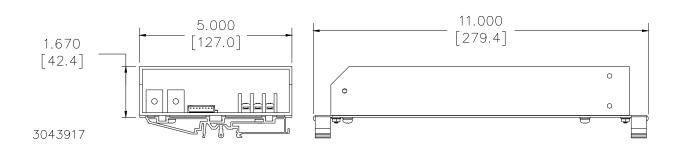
AE-800 POWER SUPPLY WITH KIT INSTALLED, OUTLINE DIMENSIONS
